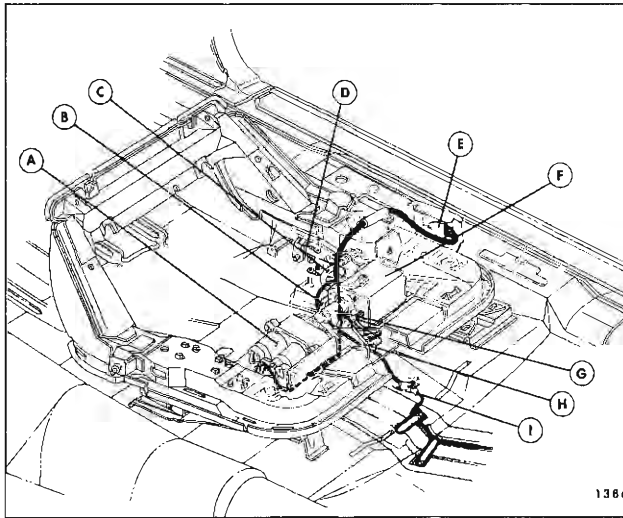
H17—Bucket Seat Wiring Installation Four-Way Power Adjusters
